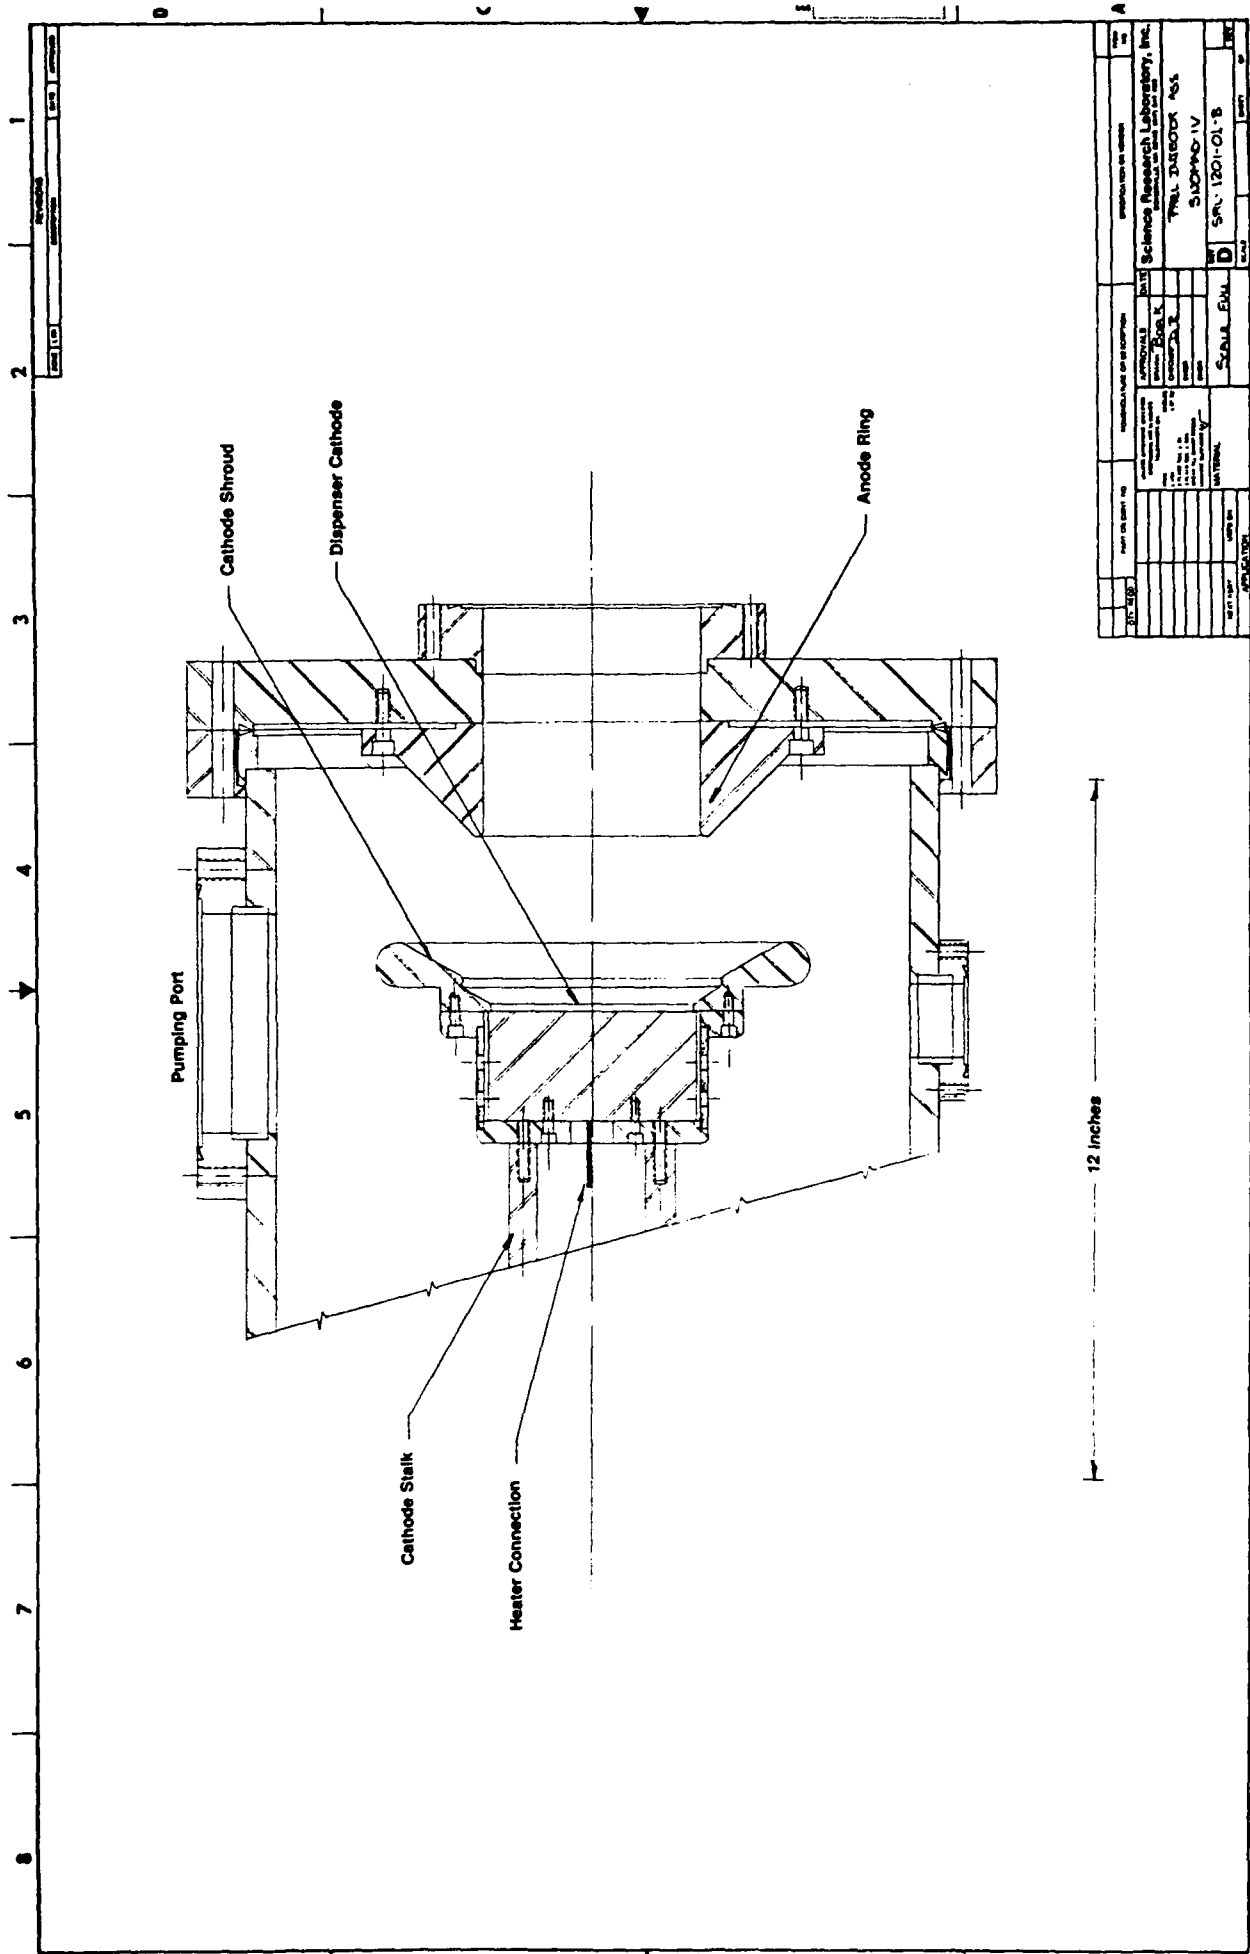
Drawing of SNOMAD-IV 0.5 MeV injector accelerator cell assembly.
